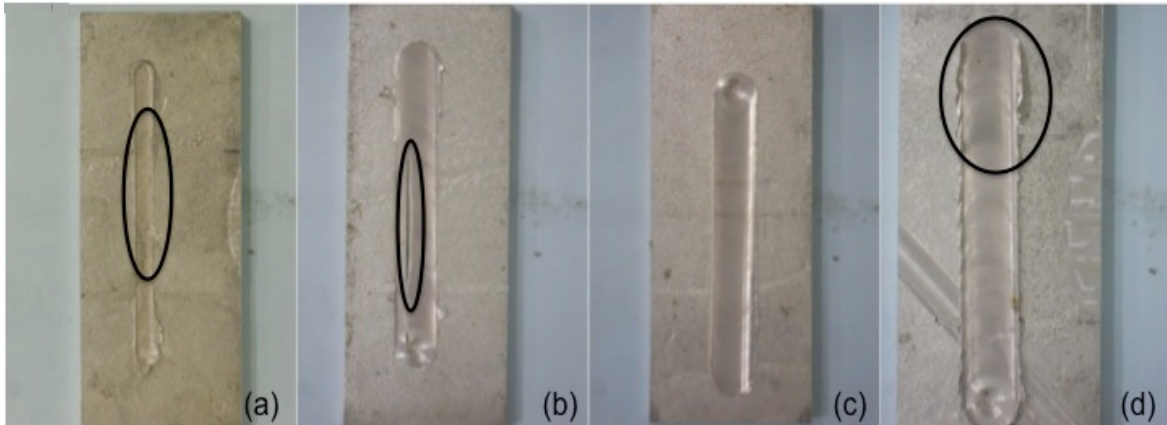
FSP finish: (a) penetration depth 3.2 mm, no tool shoulder mark (b) penetration depth 3.6 mm, groove-like defect (c) penetration depth 4 mm, smooth defect-free surface (d) penetration depth 4.4 mm, material being squeezed out.
